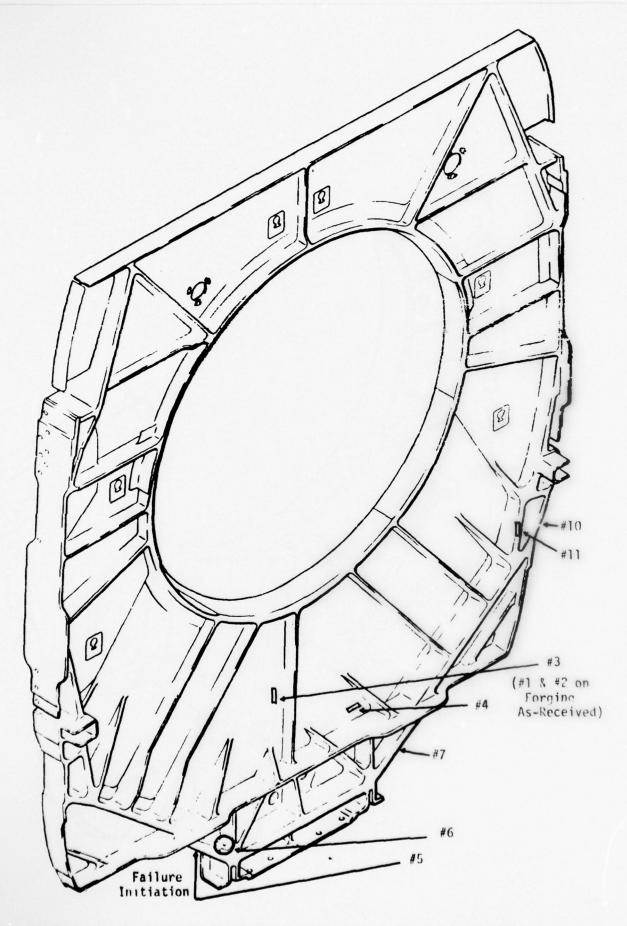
215-30402 BULKHEAD, AFT SIDE, AS-MACHINED. 4.12
